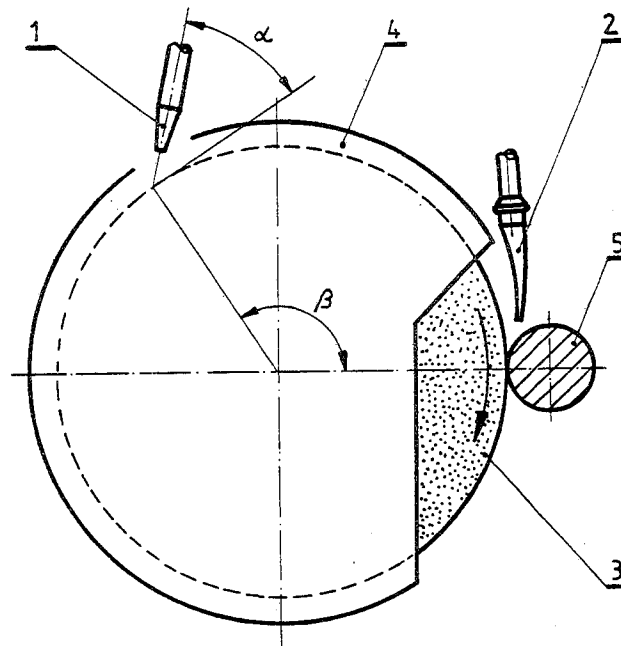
Diagram of mounting high pressure nozzle used for cleaning of the working surface of the grinding wheel: 1-high pressure nozzle, 2-standard nozzle, 3-grinding wheel, 4-safety cover of the grinding wheel, 5-workpiece, α -the angle of setting of the nozzle, β -the angle of mounting of the nozzle.
